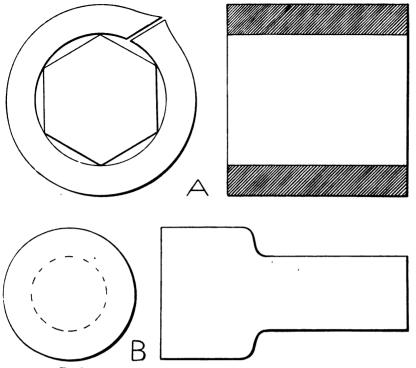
CONVENIENT METHOD OF MAKING LARGE WRENCHES
